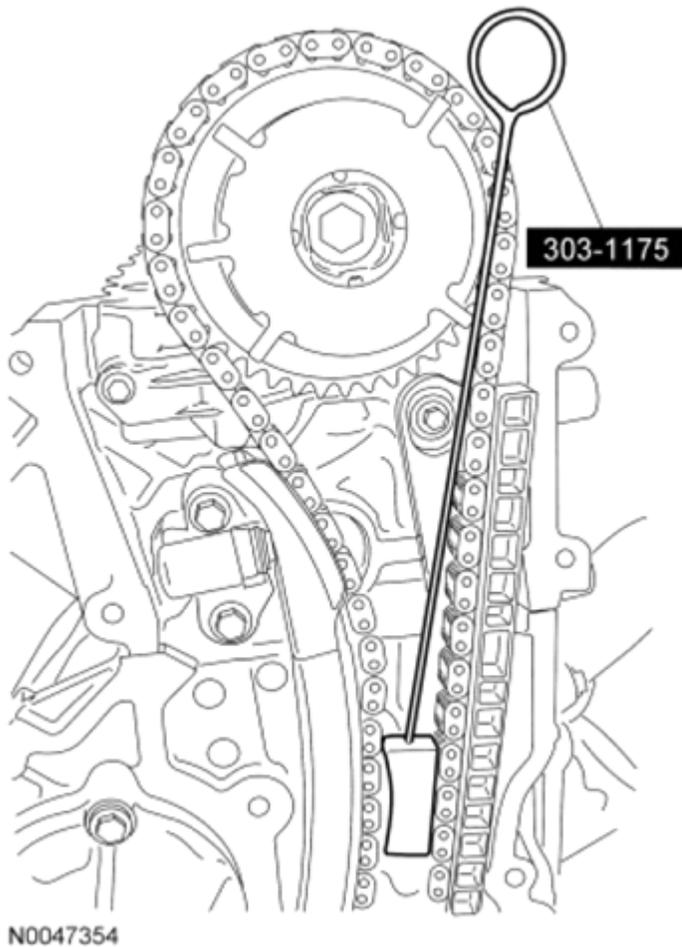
Using Timing Chain Locking Tool In LH Timing Chain
